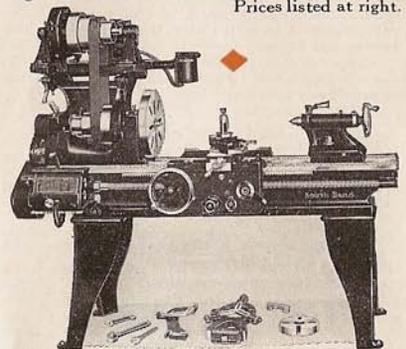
16" x 6' Silent Motor Drive Lathe. Write for Prices.
